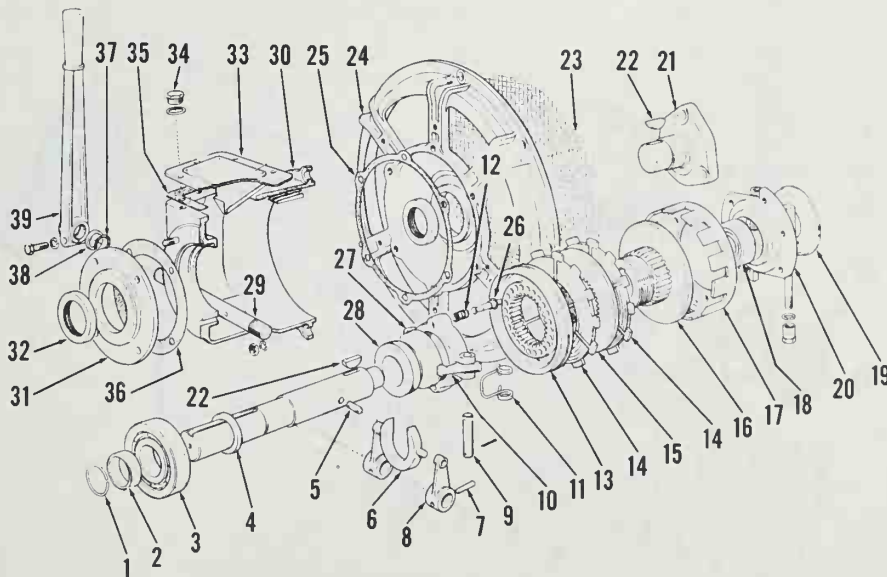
Exploded view of multi-plate clutch used on ST engines.
